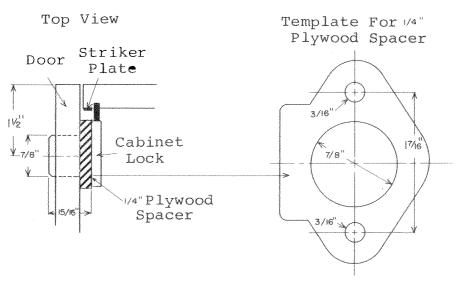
DETAILS OF THE CAMERA CASE DOOR-LATCH.
